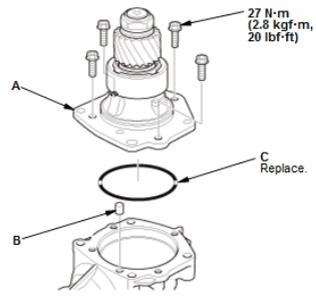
Transfer Hypoid Drive Gear/Shaft Assembly With Torque Specifications
